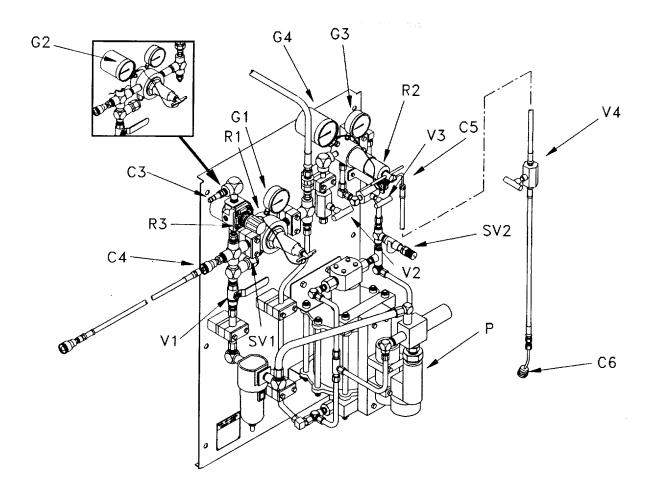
Controls and Indicators of the Booster Panel Assembly
